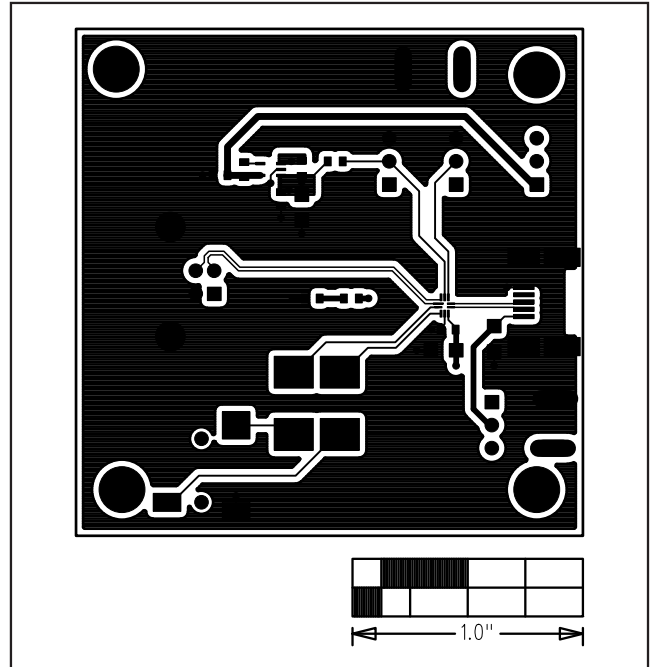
MAX14508E EV Kit PCB Layout—Component Side
